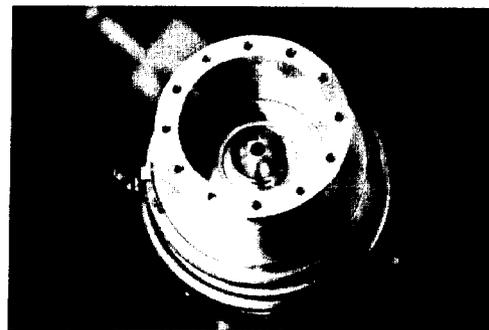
Prototype design, Non-intercepting Extraction Electrode Assembly.
